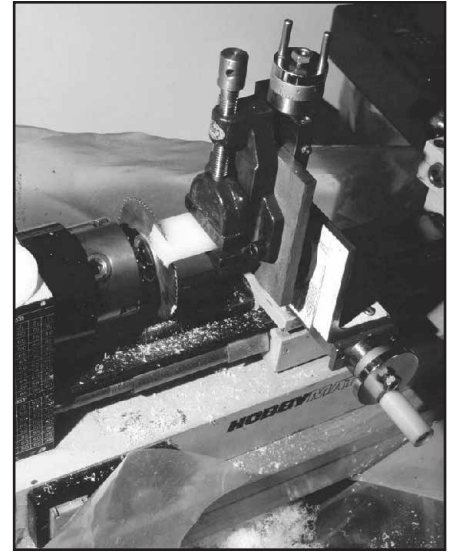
The hobby lathe cuts a servo mounting plate to rough size.
